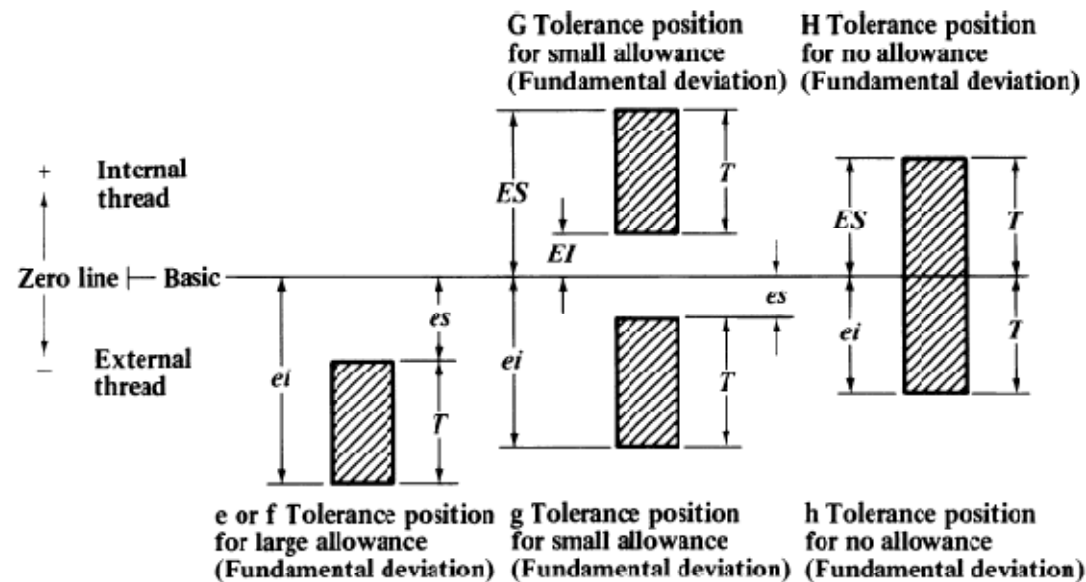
Metric Tolerance System for Screw Threads
